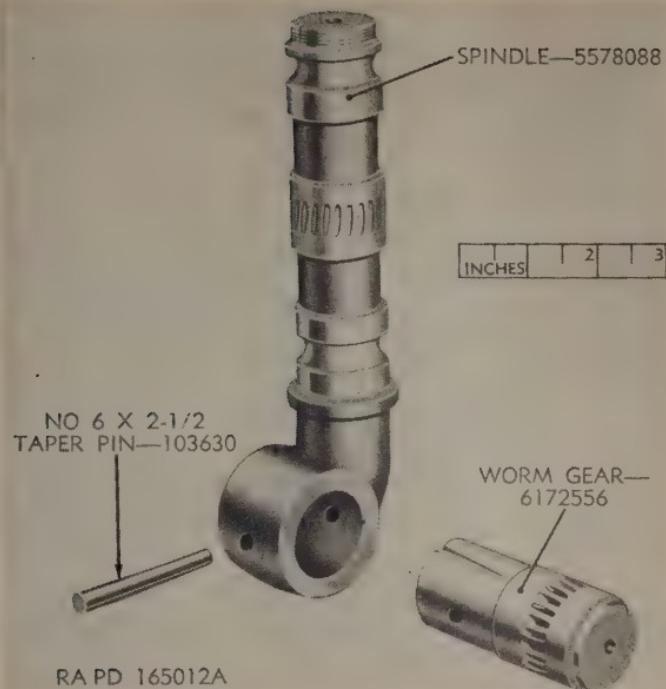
Telescope mount M28—spindle assembly—exploded view.
